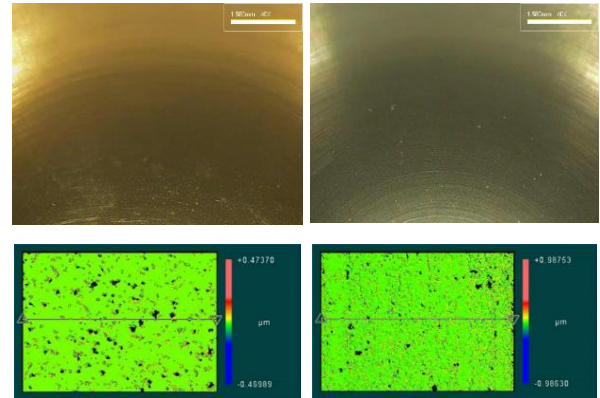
Surface roughness of aspherical lens mold core before polishing
